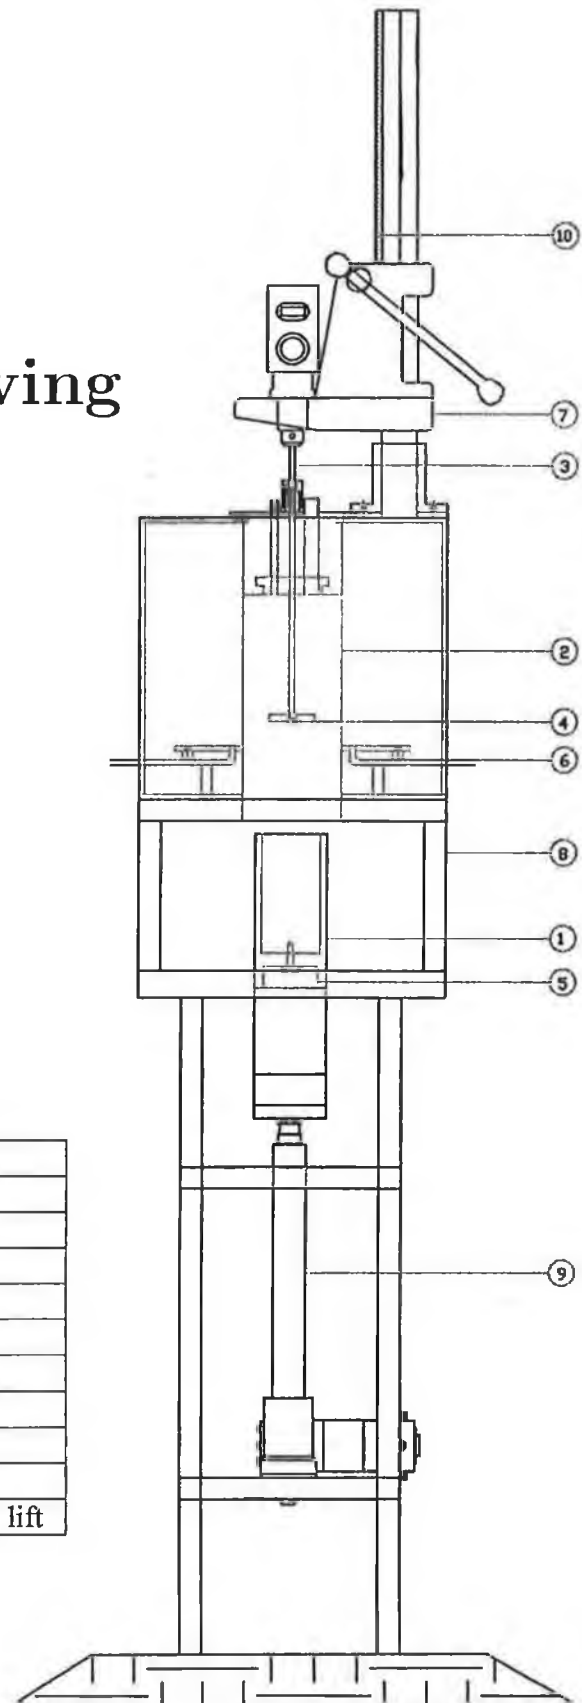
Engineering drawing of the stir-caster. All the dimensions are relative and following a scale of $\frac{100 \text{ mm}}{\text{unit}}$.
